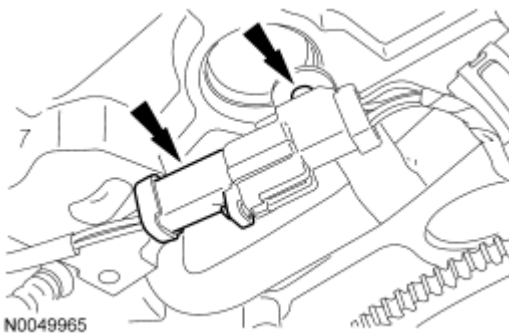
Locating LH Heated Oxygen Sensor (HO2S) Electrical Connector & Pin-Type Retainer
